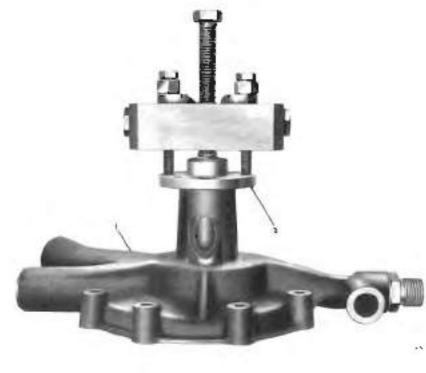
Extraction of adapter flange (Special tool RH.570)
